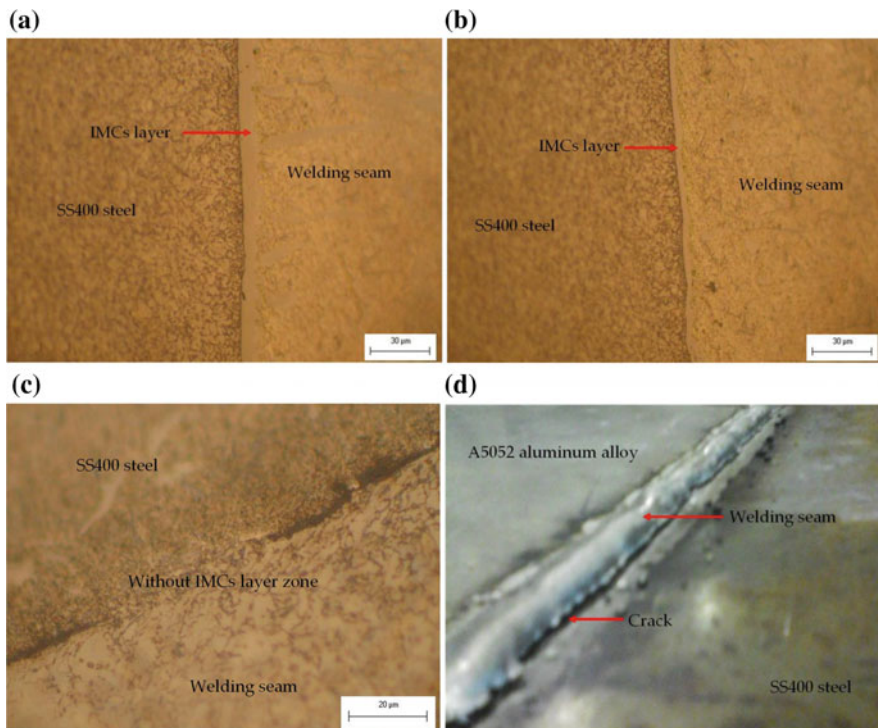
Microstructure of welded A5052 aluminum alloy/SS400 steel: a IMC layer zone on the top side; b IMC layer zone on the bottom side; c without the IMC layer zone; and d cracking after welding
